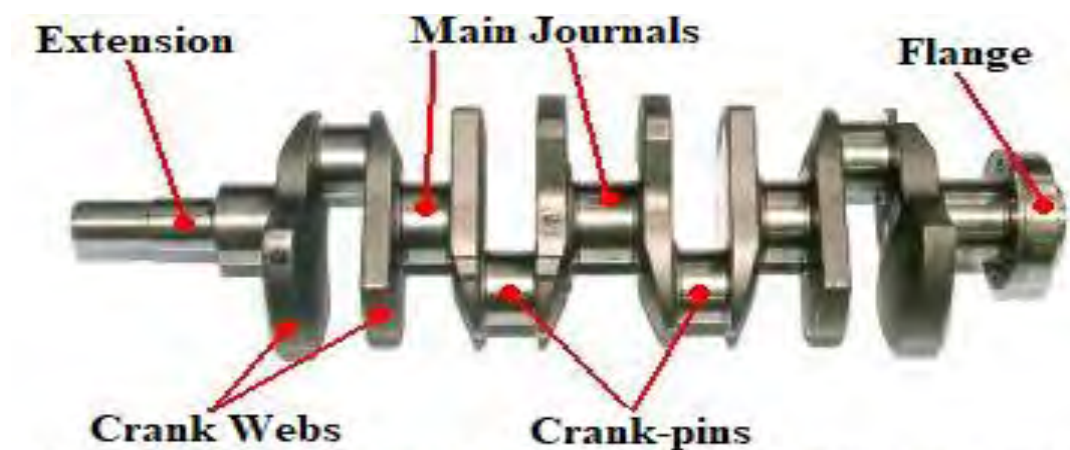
Crankshaft of Four-cylinder Inline Engine
